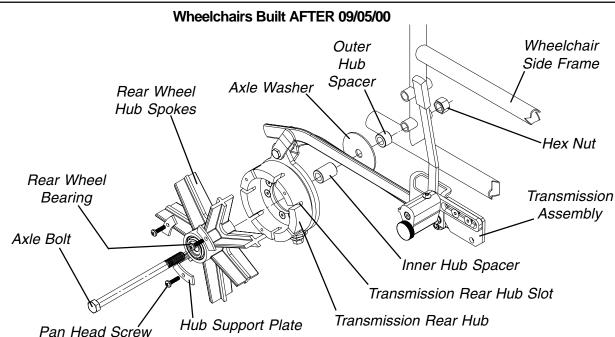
INSTALLING/REMOVING REAR WHEEL TO/FROM TRANSMISSION REAR HUB - INSTALLING/REMOVING THE HUB SUPPORT PLATES - INSTALLING/REMOVING THE AXLE BOLT
